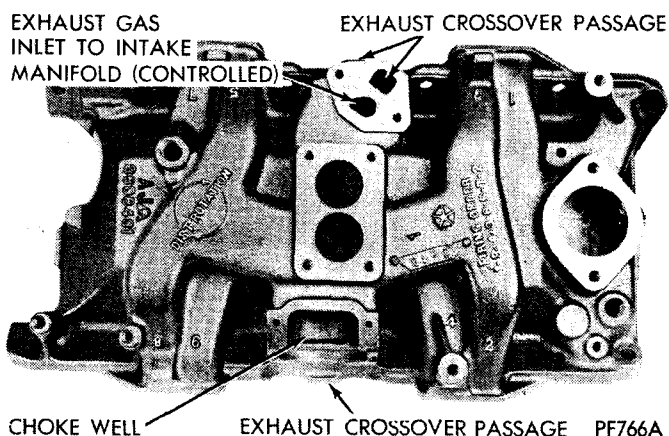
Intake Manifold 318 and 360 Cubic Inch Engines (Typical)
